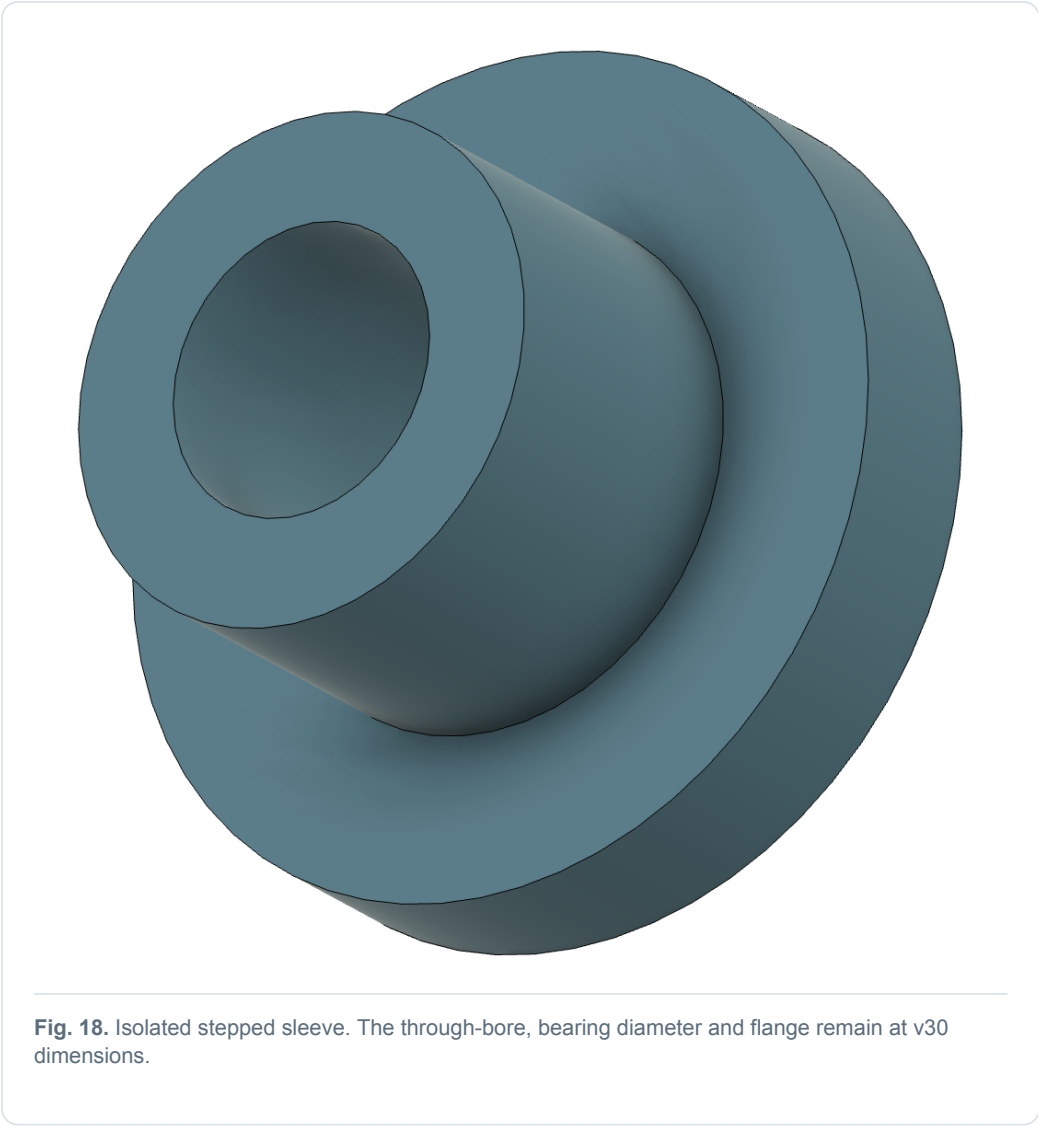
Isolated stepped sleeve. The through-bore, bearing diameter and flange remain at v30 dimensions.
